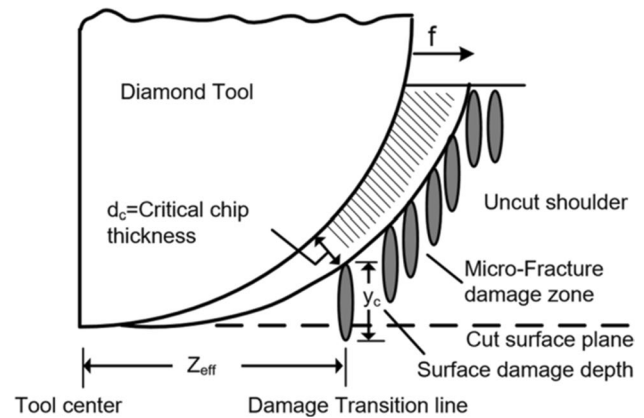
Schematic cutting model for the critical depth-of-cut [56]
